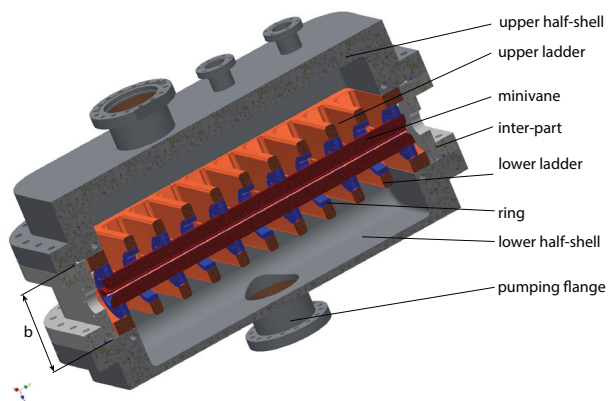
Isometric view of the Ladder-RFQ. The copper carrier-rings (coloured in blue) guarantee the electrode positioning as well as the RF contact. The ladder structure consists of bulk copper components. Any brazing or welding processes were avoided on the copper structure.
